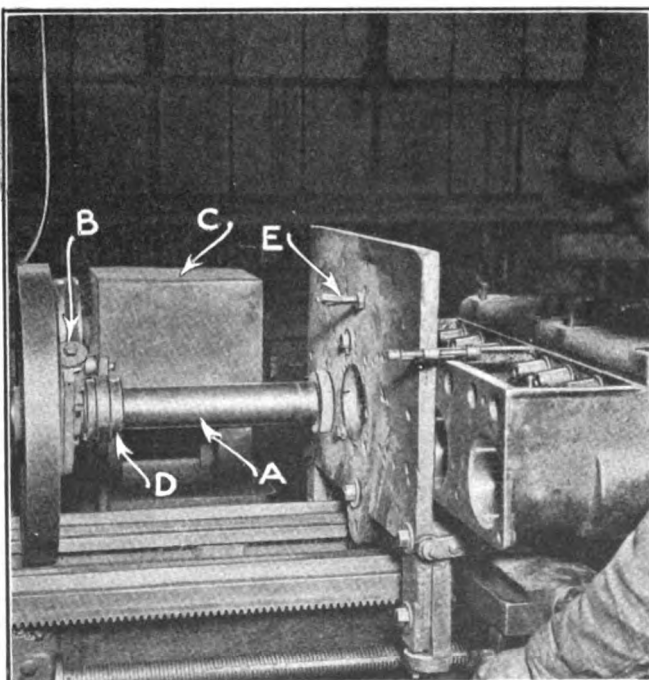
GRINDING CYLINDER BORES ON A LATHE
